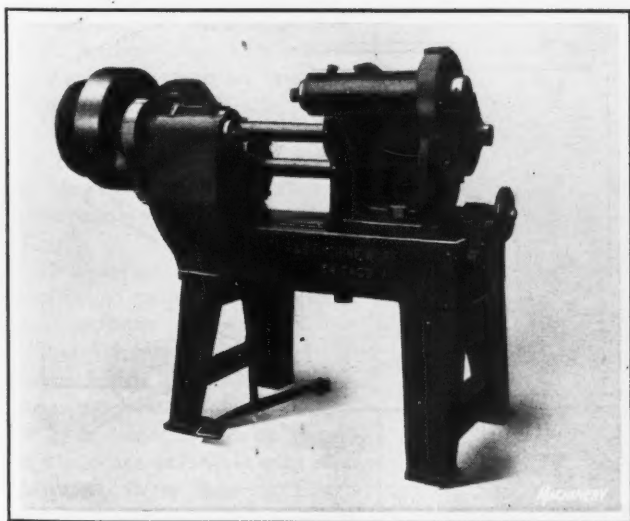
S. & S. Beading, Curling, and Trimming Machine
